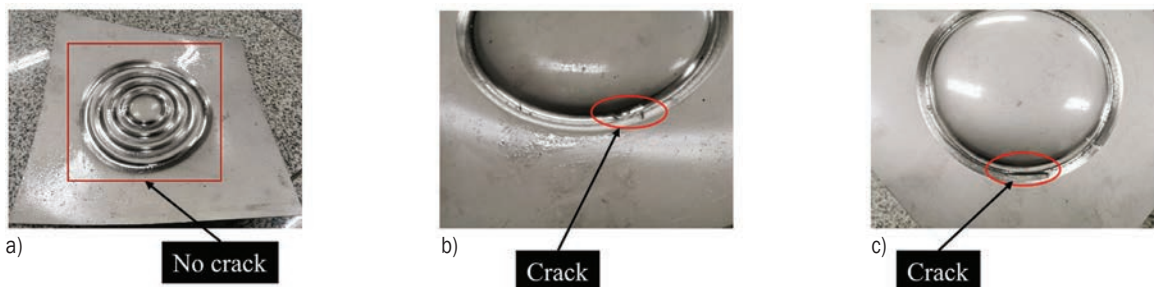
The effect of step sizes on forming defects; a) 0.2 mm, b) 0.4 mm, c) 0.6 mm
